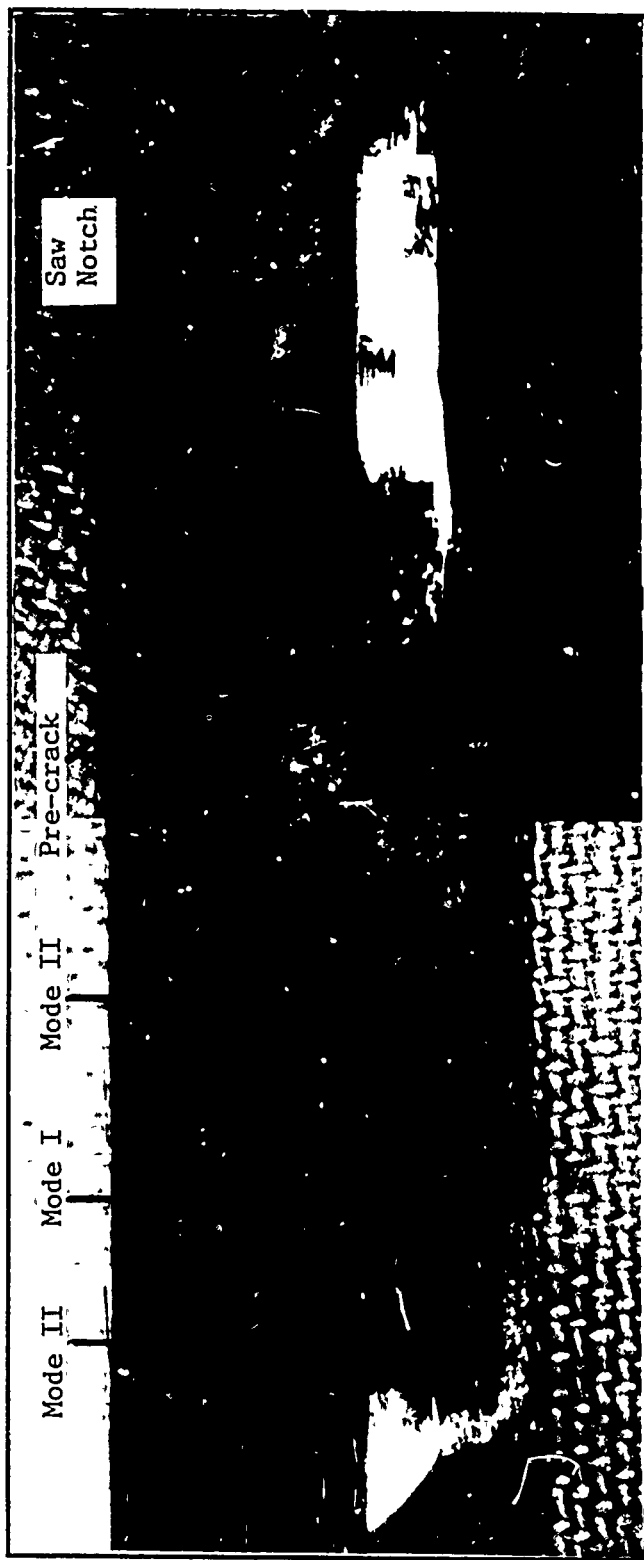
Fracture Surface of Specimen 88C1008 Magnified 6.3X
